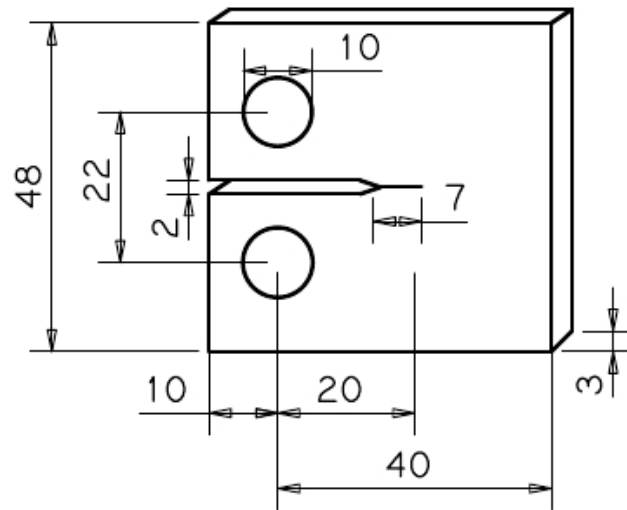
Test specimen nominal dimensions (in mm) for compact tension (CT) fracture toughness test.
